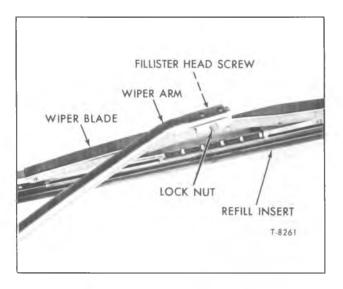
Wiper Blade Installed (Tilt Cab Model)
